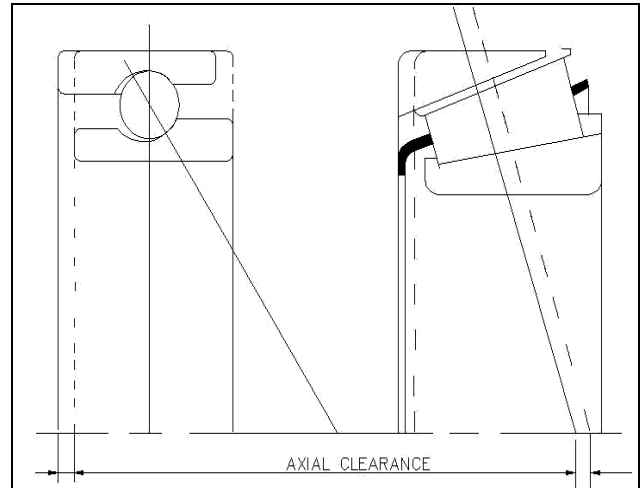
Axial Clearance in Angular Contact Ball Bearing
